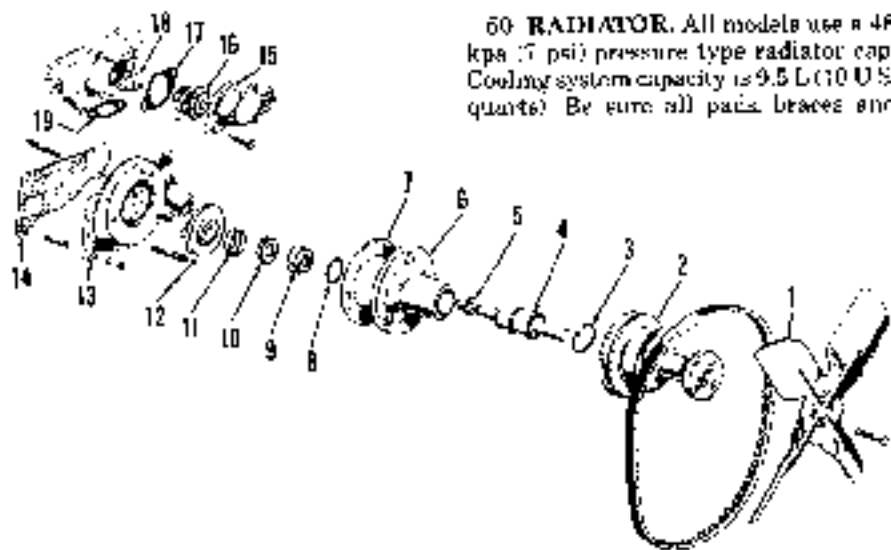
Exploded view of water pump assembly used on gasoline models.
